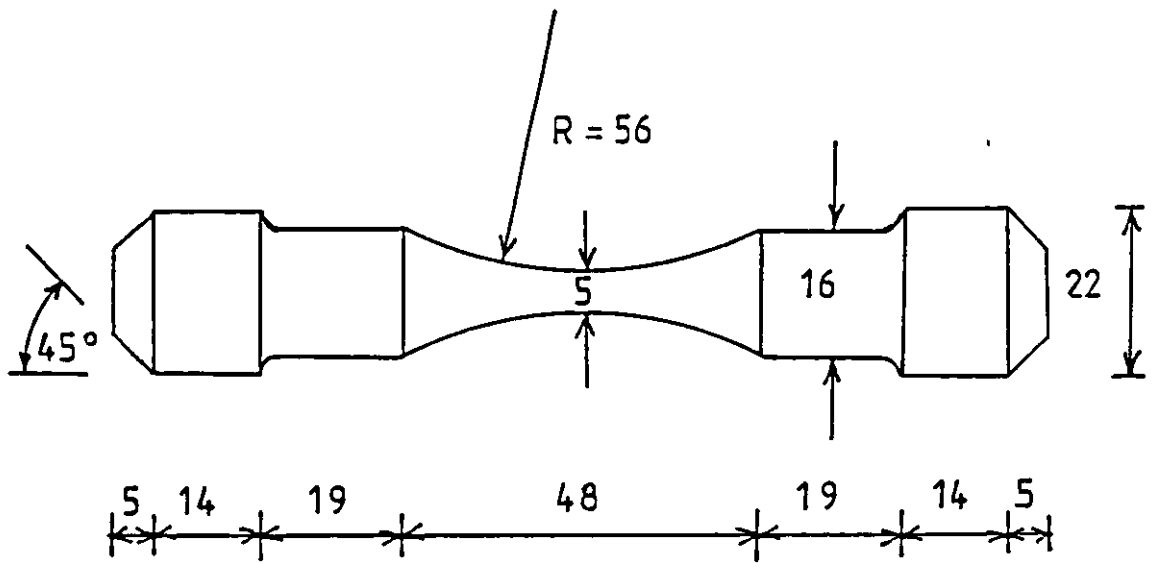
Detail drawing of the chain material fatigue specimen (all dimensions in mm).
